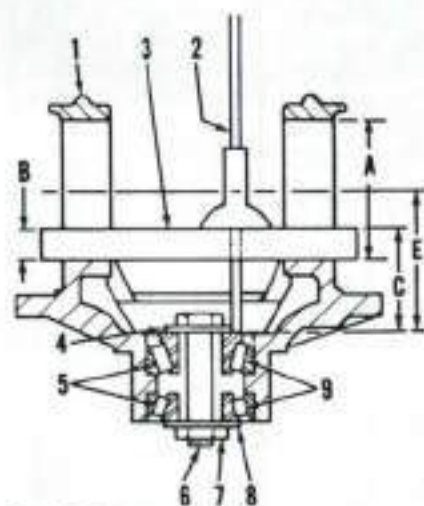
Diagram showing method of securing pinion shaft bearings in carrier housing to allow depth gage measurement to be taken when setting pinion bearing preload. Refer to text.
